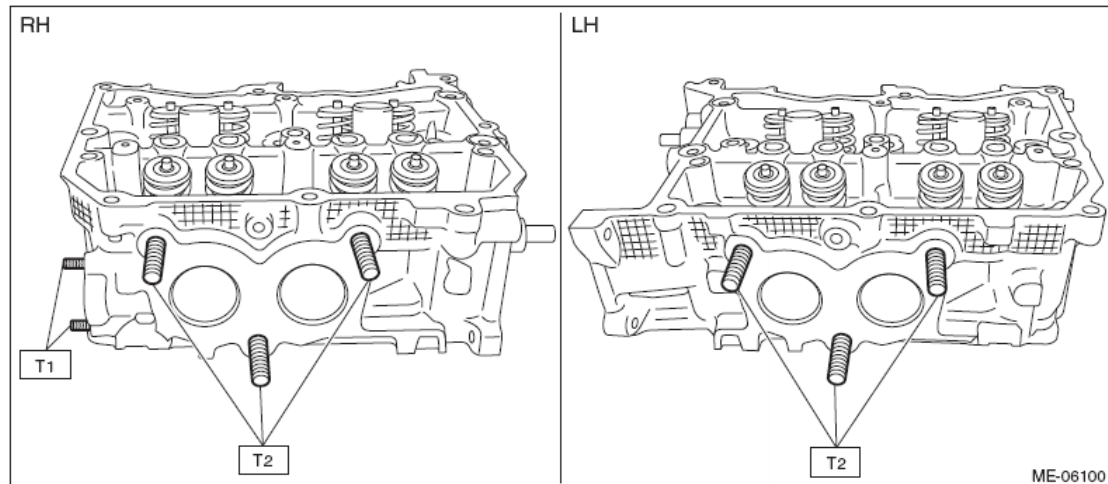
Identifying Cylinder Heads Stud Bolts Tightening Sequence
